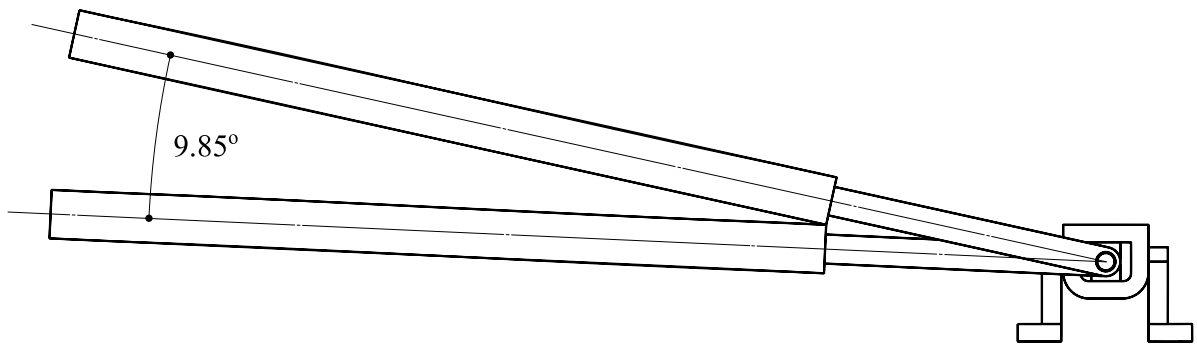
The minimum flare angle of shaft ends on double Cardan joint.
